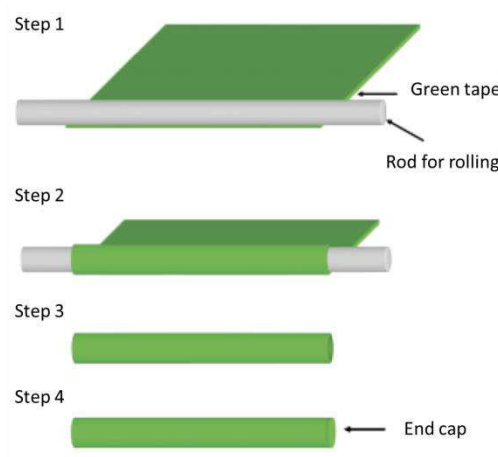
Schematic of a tape casting and rolling process¹¹.
